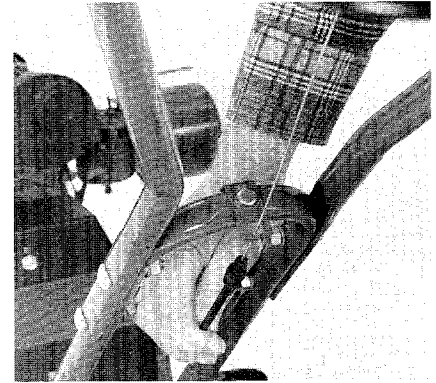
Remove the Forward Clutch Cable from the cable bracket.
